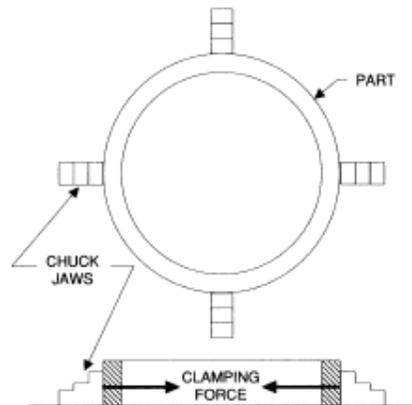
Directing the clamping forces against an unsupported area will cause this cylindrical part to deform.
